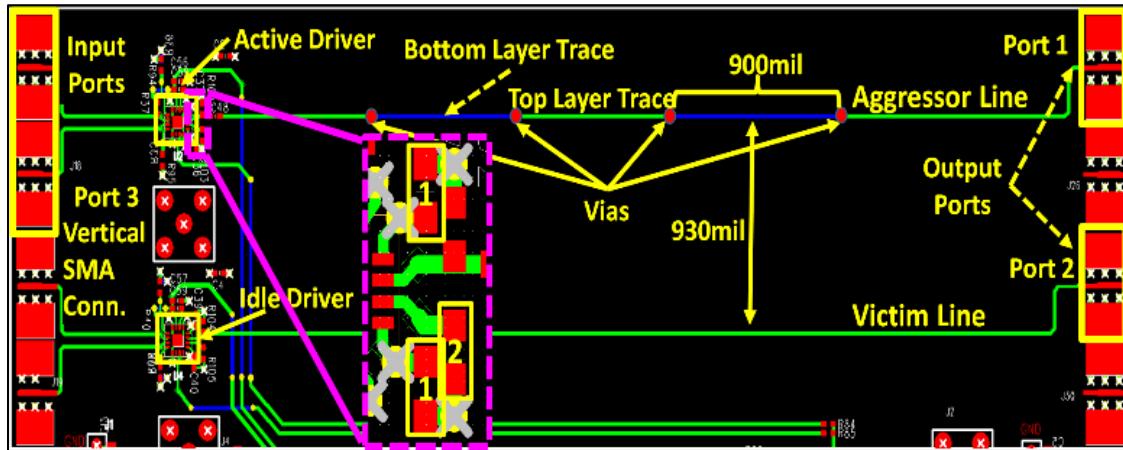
Sample printed circuit board layout showing critical components and dimensions
